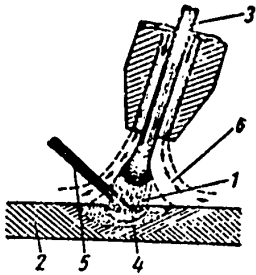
Sketch of Arc-Welding in Inert Gases
